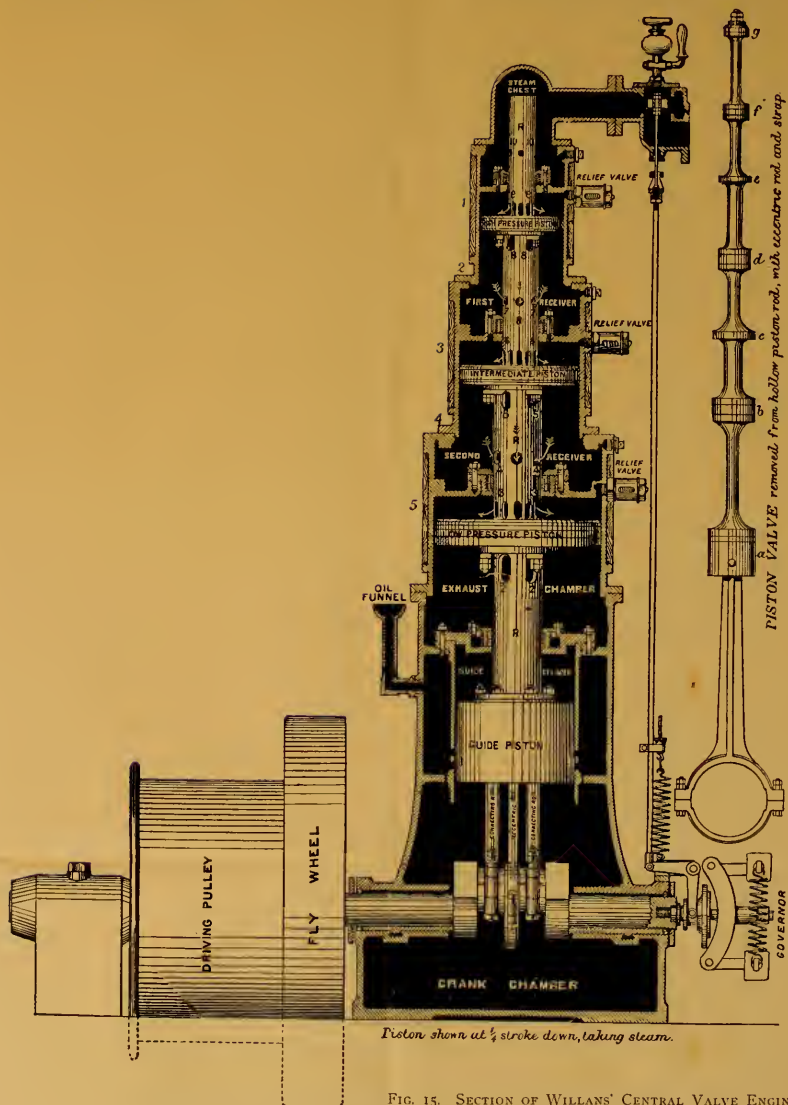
SECTION OF WILLANS' CENTRAL VALVE ENGINE.
